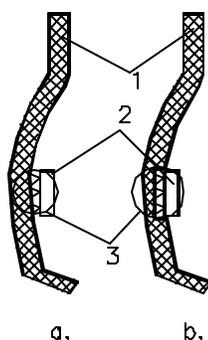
Schematic of sensor welding on the rear lamp back face plastic
